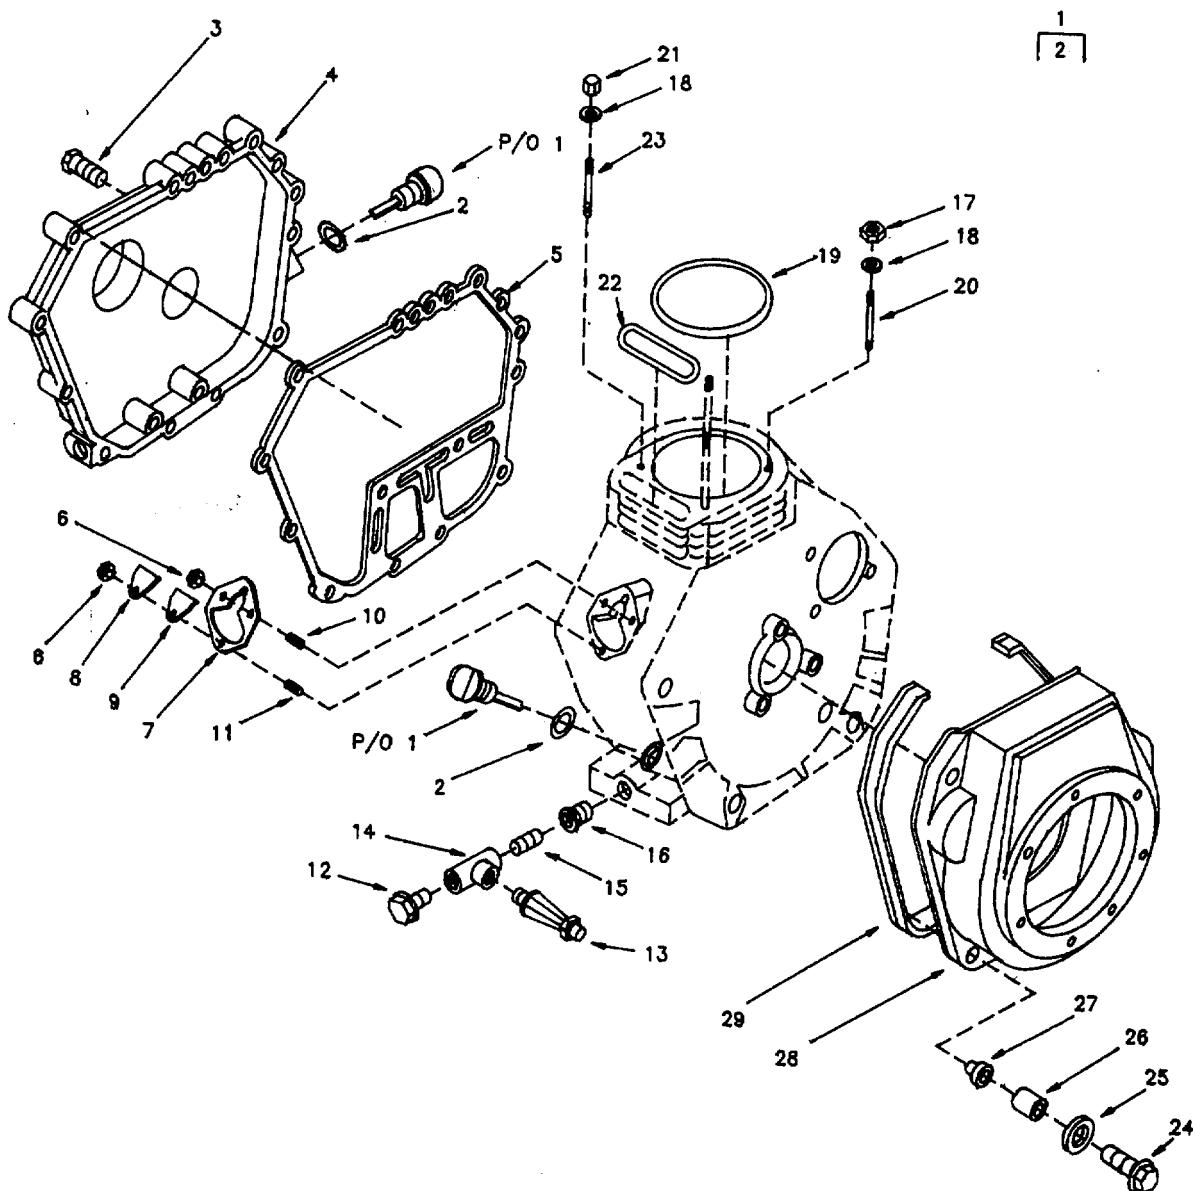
Diesel Engine Block and Cooling Fan Case
